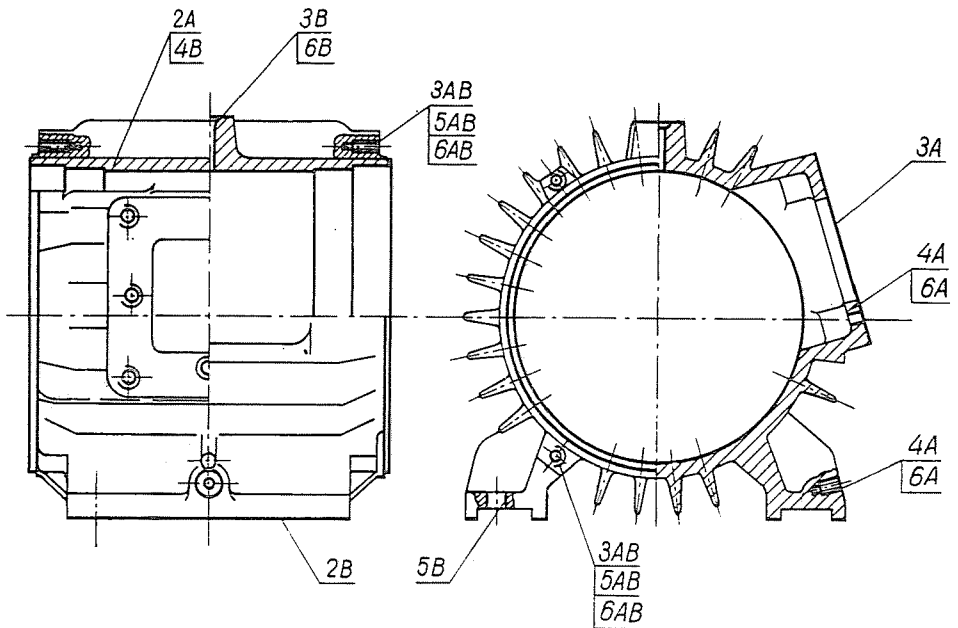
Diagram of motor casing for machining on Type CD 2 Transfer Machine
